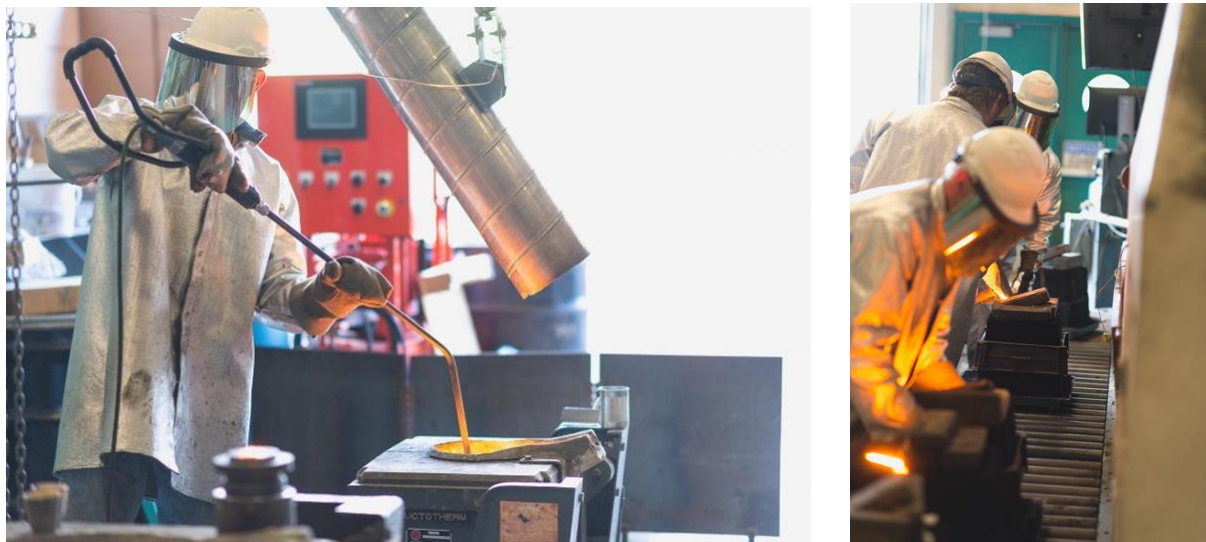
Melt temperature measurement and casting line mold set up with wired thermocouples.
